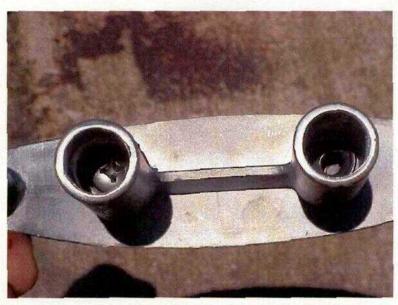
Close-up showing typical failure of Phillips cleat-retaining screw head breaking off. Note the absence of the Phillips head in the right side sleeve.
